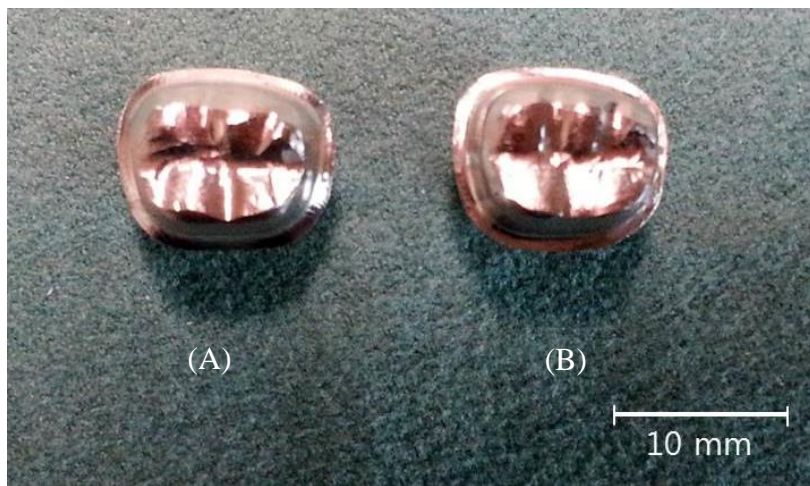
Titanium master model produced based on the 3D design. (A): Deep chamfer margin. (B): Rounded shoulder margin.
